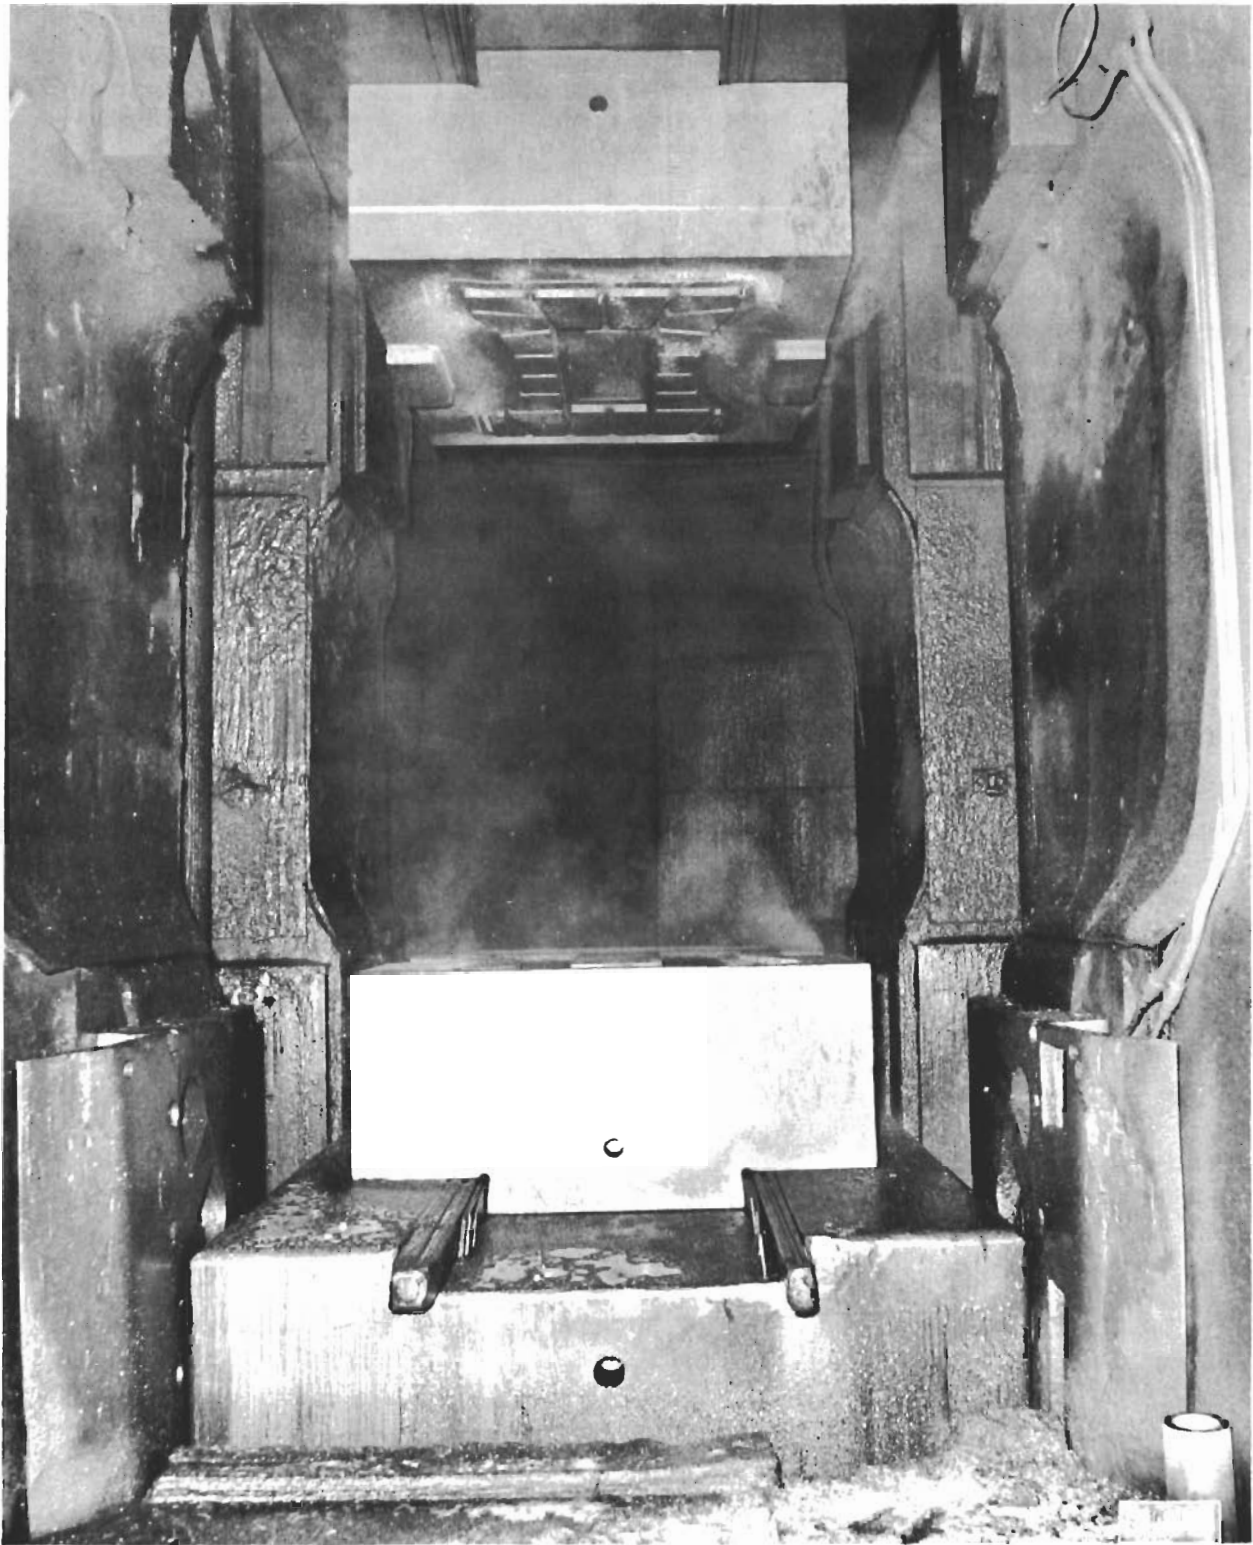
Dies for the Finish Bulkhead Forging Operation with the 125,000 MKG Counterblow Hammer. Shown Installed in the Hammer.
